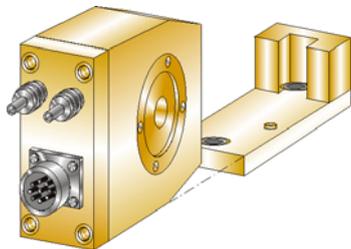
Coil adapter Therm coil size I, see Figure 10 for details of installation
